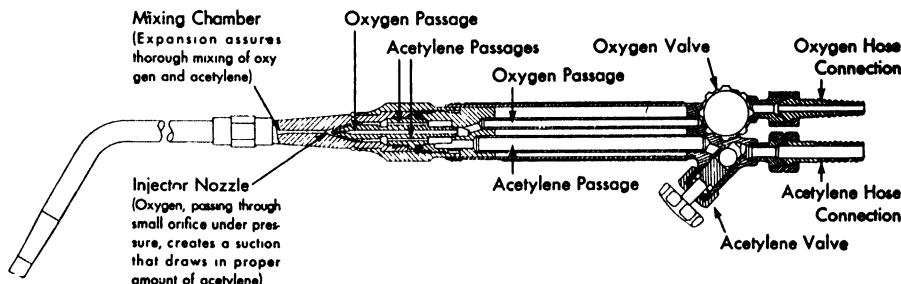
Oxyacetylene welding torch (cross section). (The Linde Air Products Company.)
